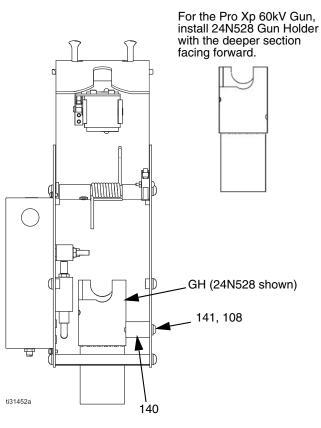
Gun Holder Installation (Pro Xp 60kV Gun)
